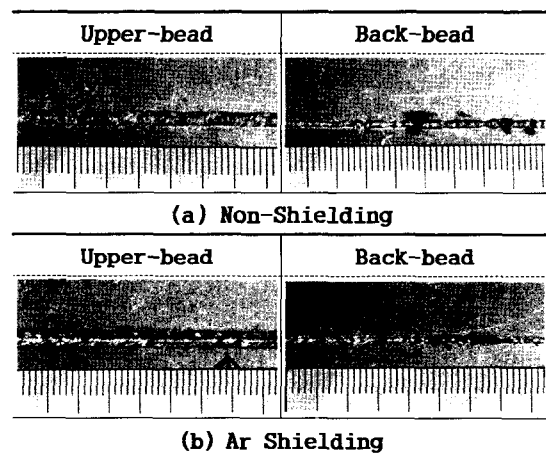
Upper and back beads of 5052 aluminum alloy laser welds made with and without Ar shielding gas.
